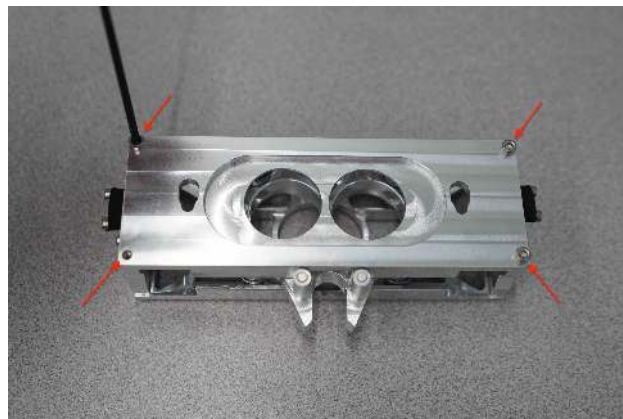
Remove four socket head cap screws with 2.5mm driver to disassemble and clean dropper.
